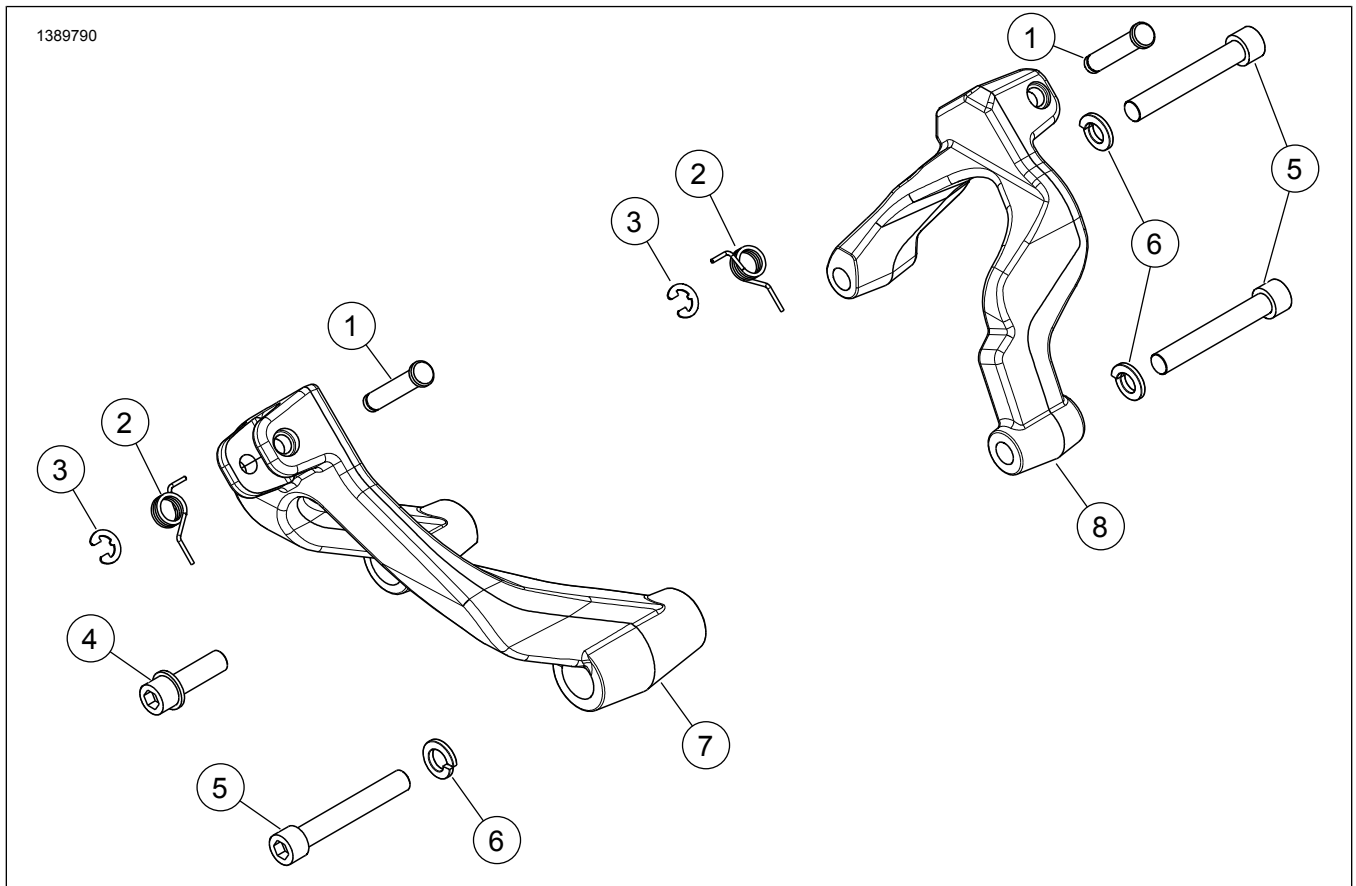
Kit Contents: Board-to-Peg Conversion Kit Components
